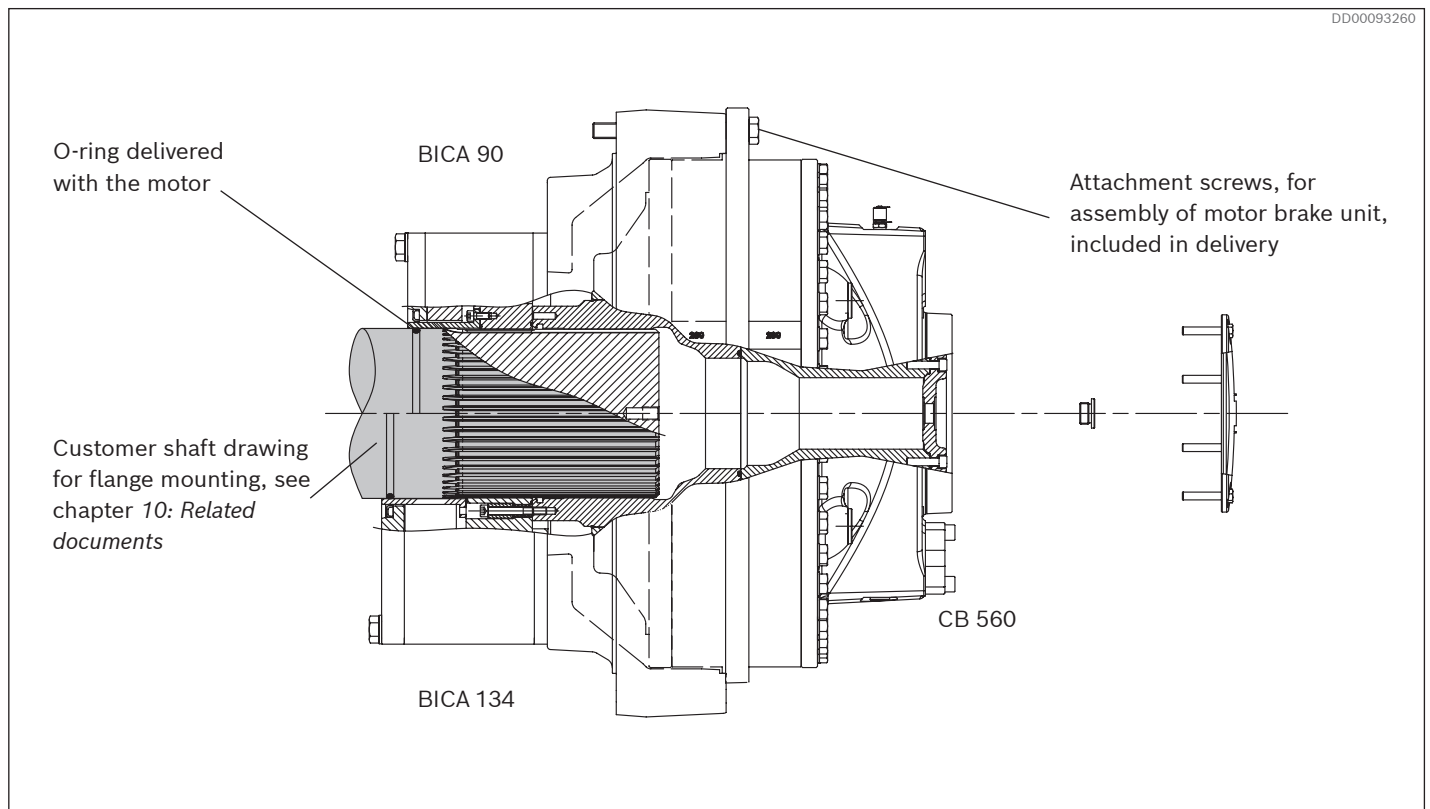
Example flange mounted CB motor with spline and BICA brake on customer shaft
